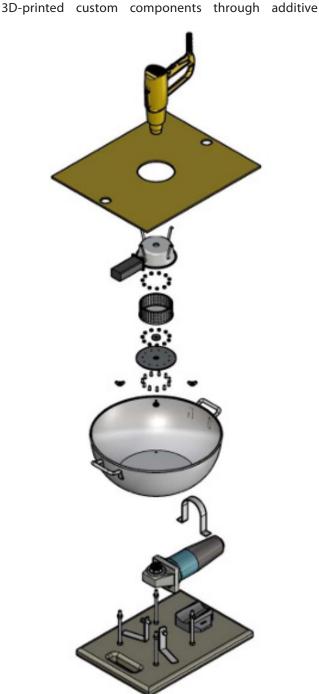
Exploded view of the first construction of the machine. Source: The authors
